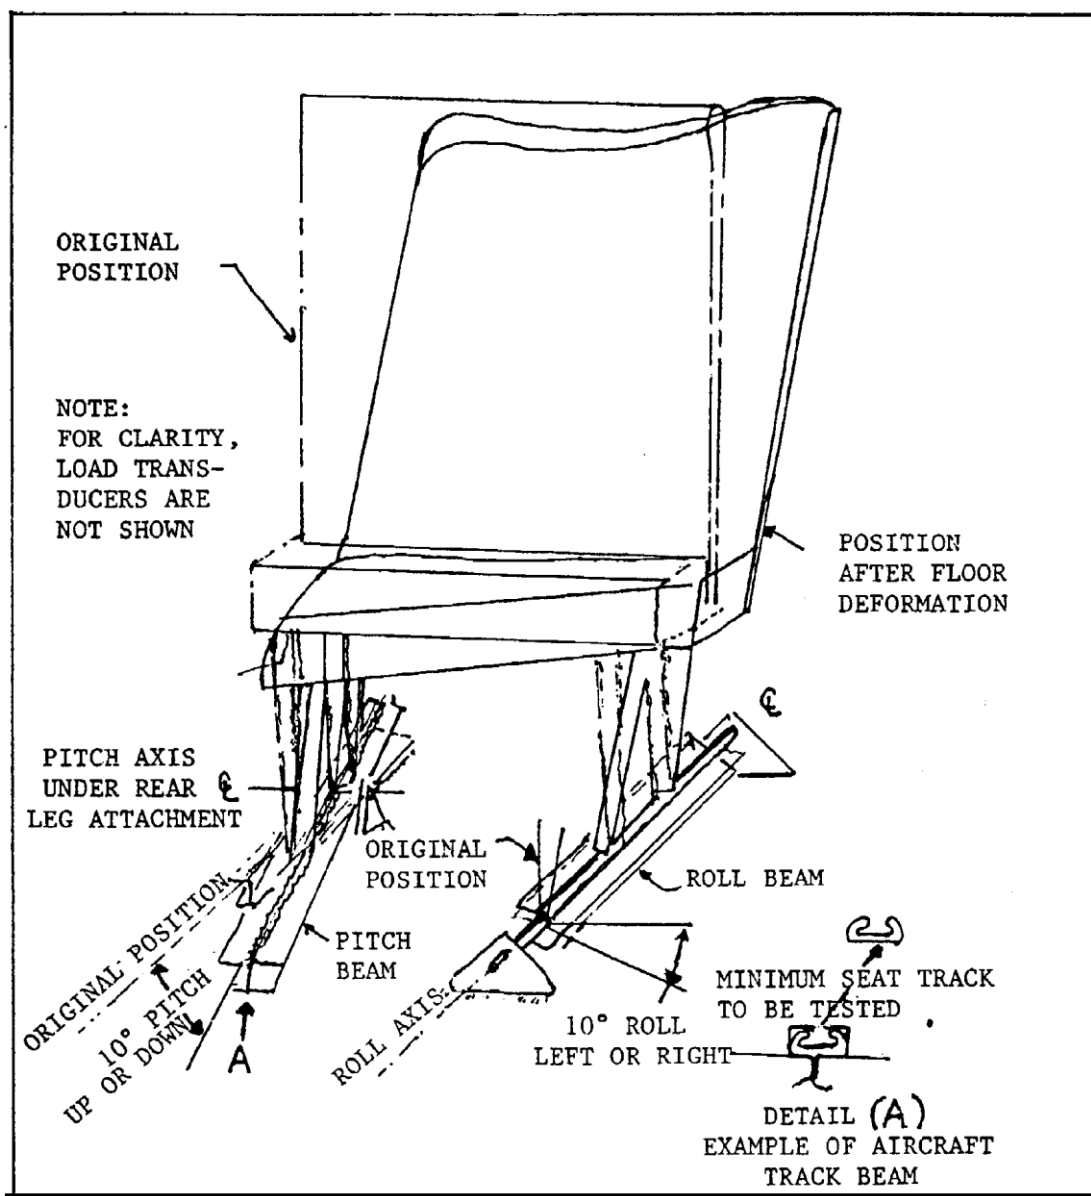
Schematic Floor Deformation Fixture;
